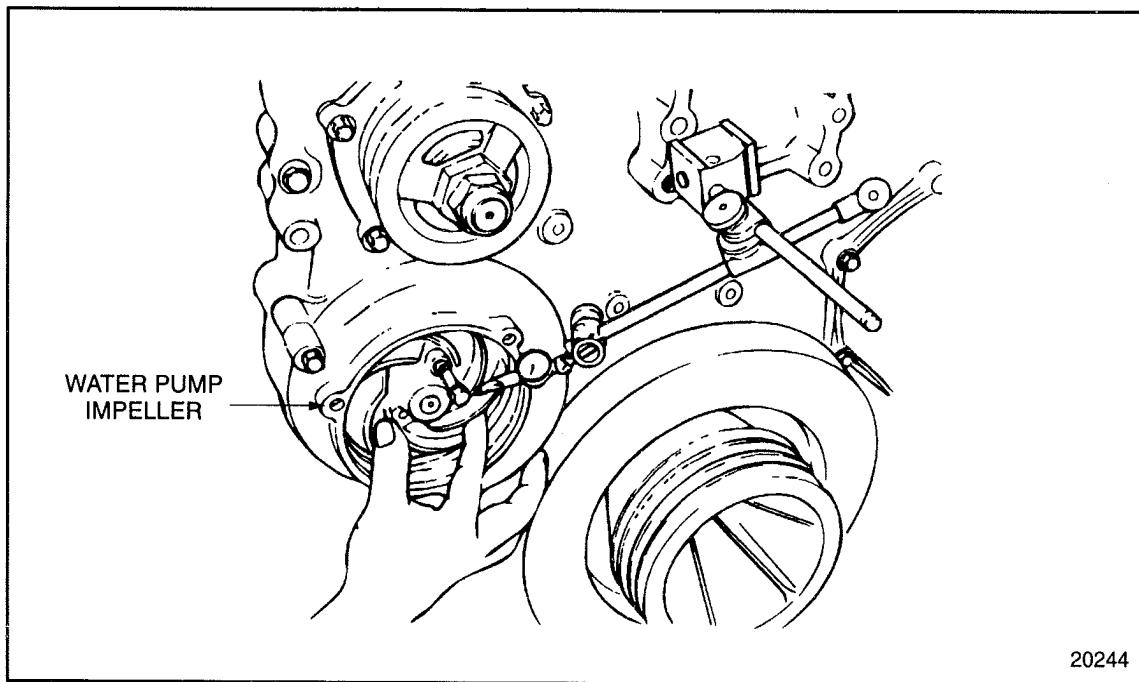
Water Pump Drive Gear-to-Bull Gear Lash Measurement
